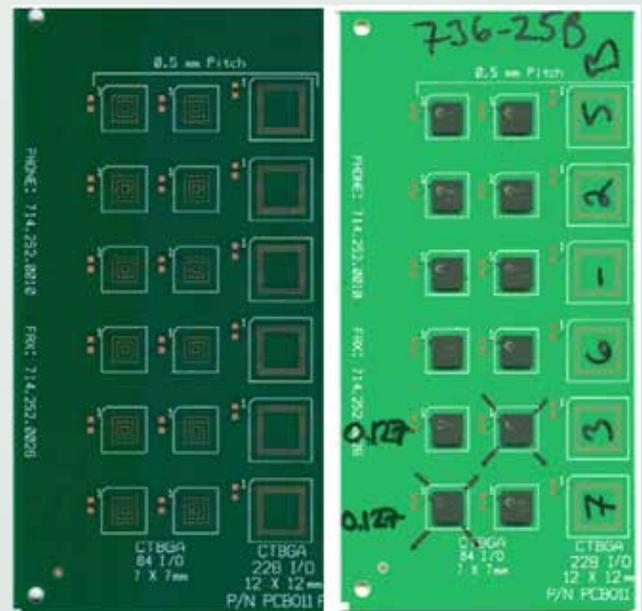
Test board used in demonstration of EF-A before and after BGA assembly.
